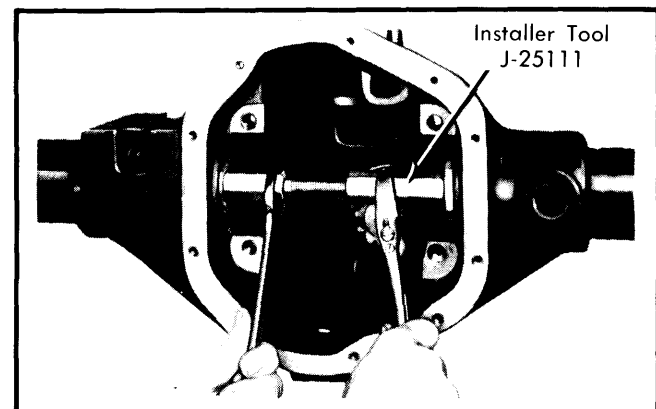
Correct Procedure for Installing Inner Oil Seals
